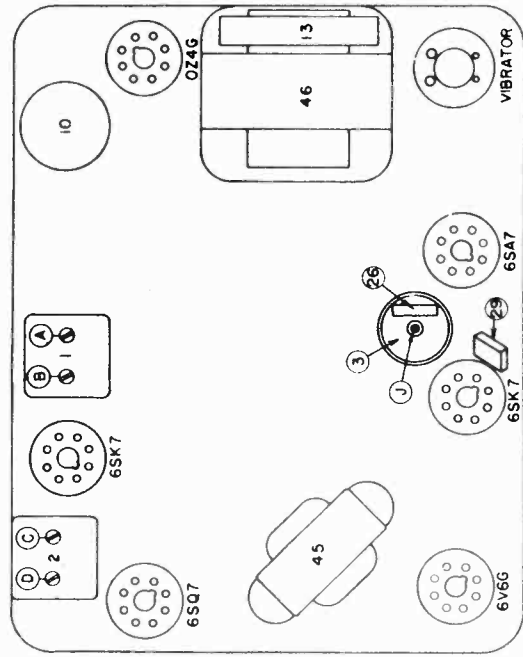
PARTS LAYOUT--DASH UNIT--Top View
